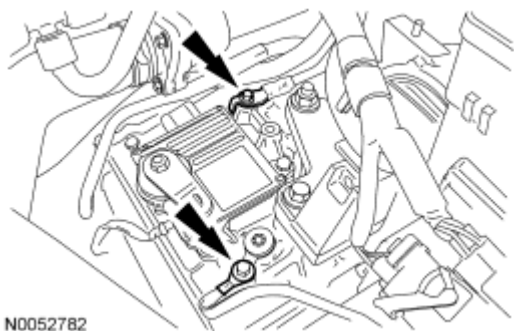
Locating Transaxle Control Cable Bracket Bolts
